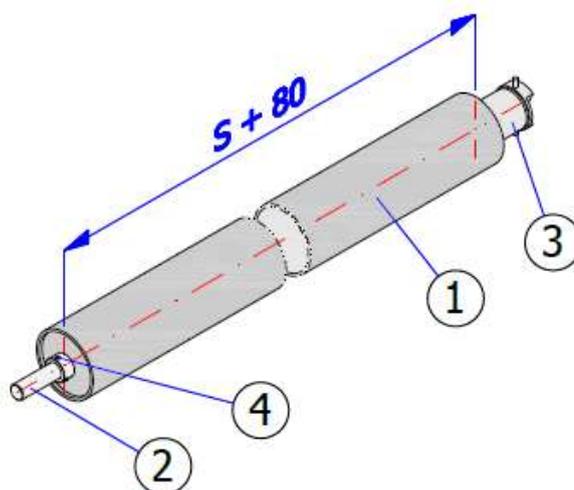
ISOiK-Ok60-01.05 [winding shaft with internal drive]
